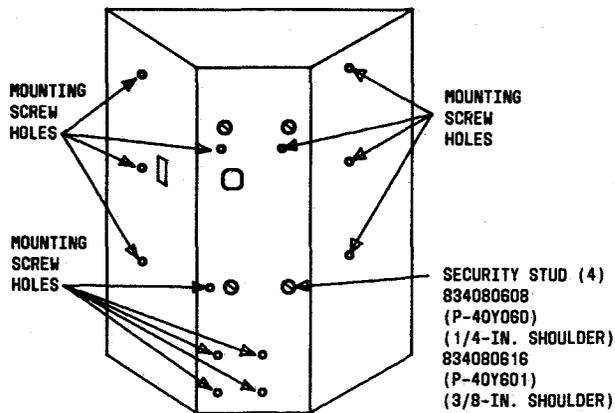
Location of Mounting Screw Holes and Security Studs In 2D-Type Set
